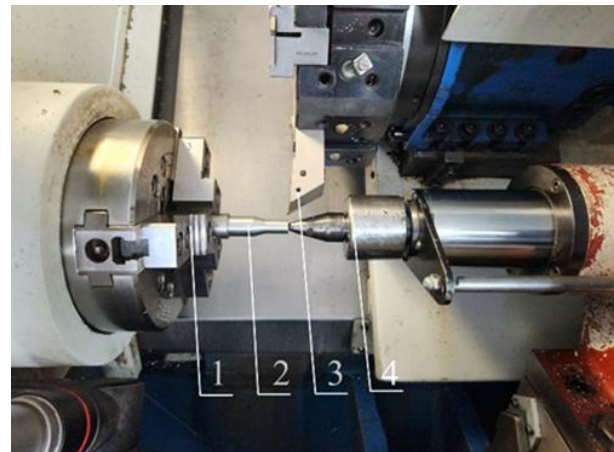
Workspace of a computer-controlled lathe. 1-self-centering chuck, 2- workpiece, 3- cutting tool, 4- rotating center.
